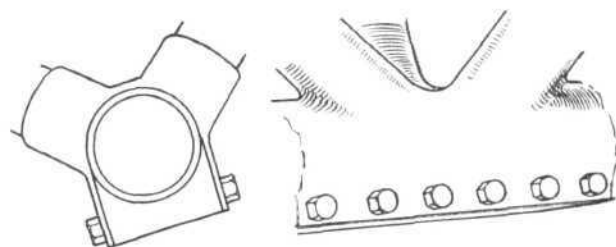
In certain of the S.E.C.M. joints aluminium blocks are used to close the socket, numerous bolts being used.
